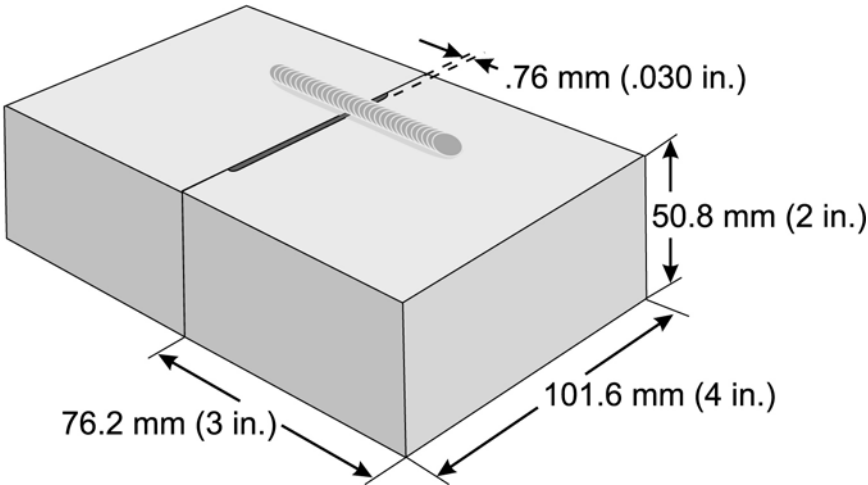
Drawing of the Gapped Bead-on-Plate (GBOP) Weld Joint
